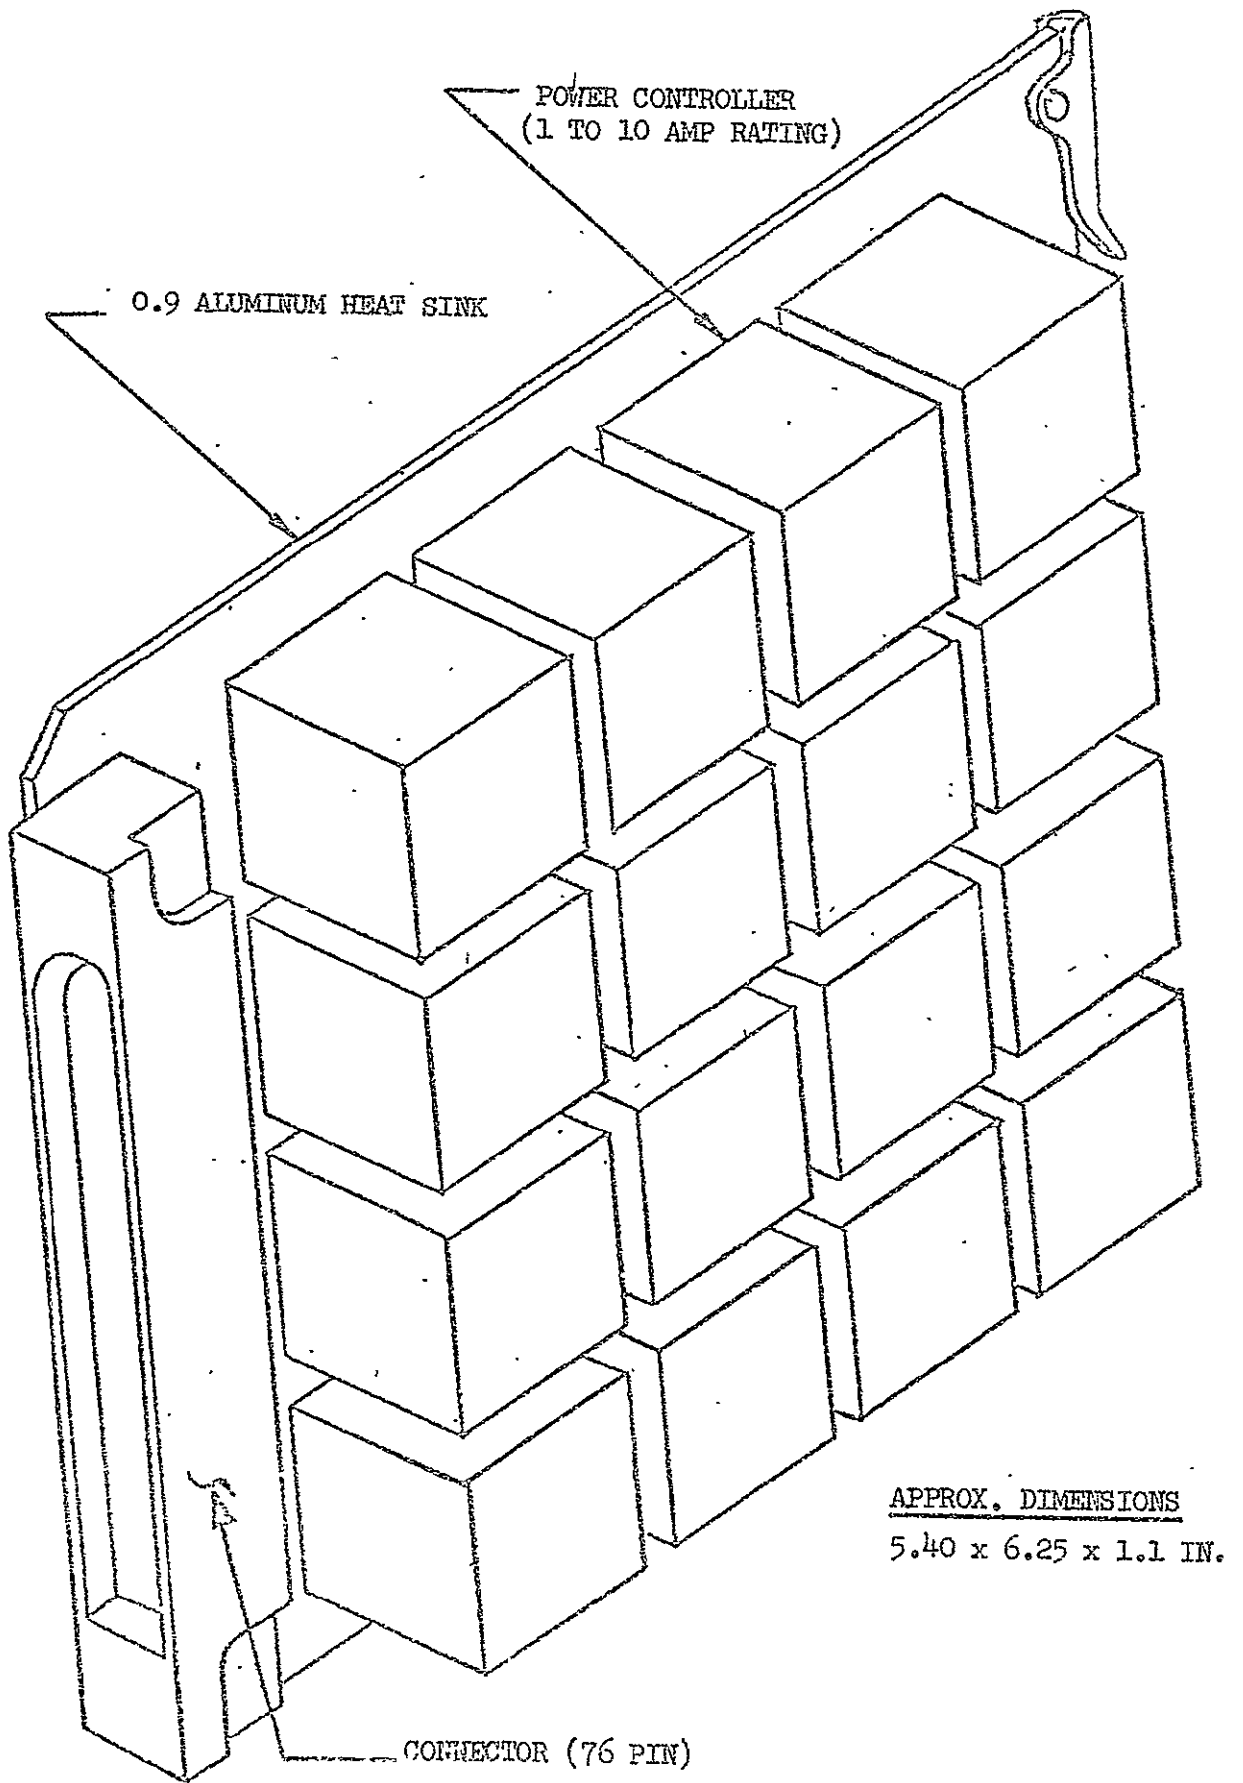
POWER CONTROLLER BOARD ASSEMBLY
